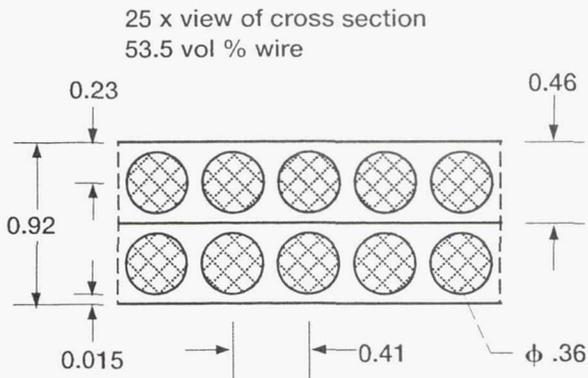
Refractory metal wire reinforced superalloy composite panel design. Dimensions in mm.
